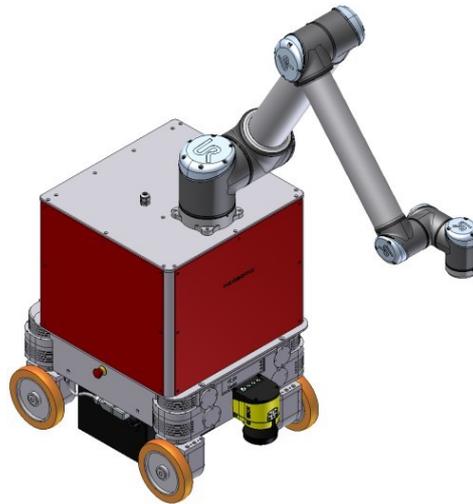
Controller cabinet and robot arm mounted onto the mobile platform
